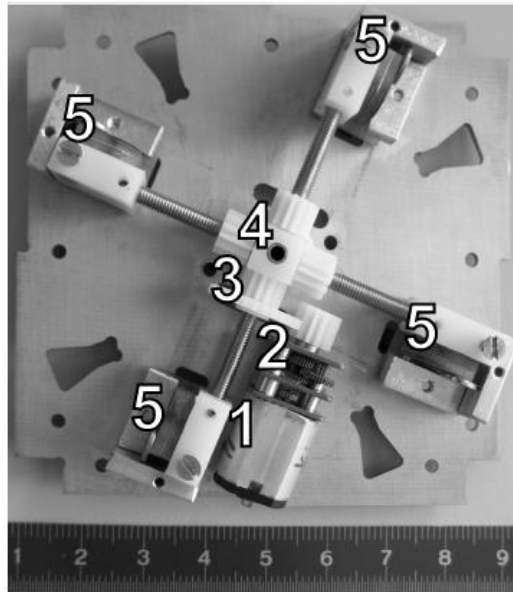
Top View of the ACM connection plate: (1) DC Motor, (2) Gearbox, (3) Spur gear system, (4) Distributing gearbox, (5) Latch hook mechanisms [28].
